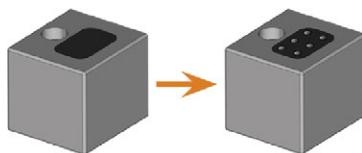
TOOL MAGAZINE BEFORE AND AFTER DRILLING THE TOOL POSITIONS
